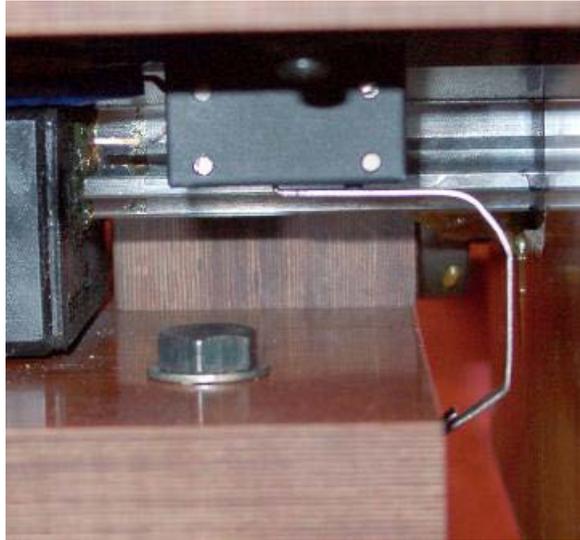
Limit switch – microswitch mounted on the table is tripped by bed of machine
